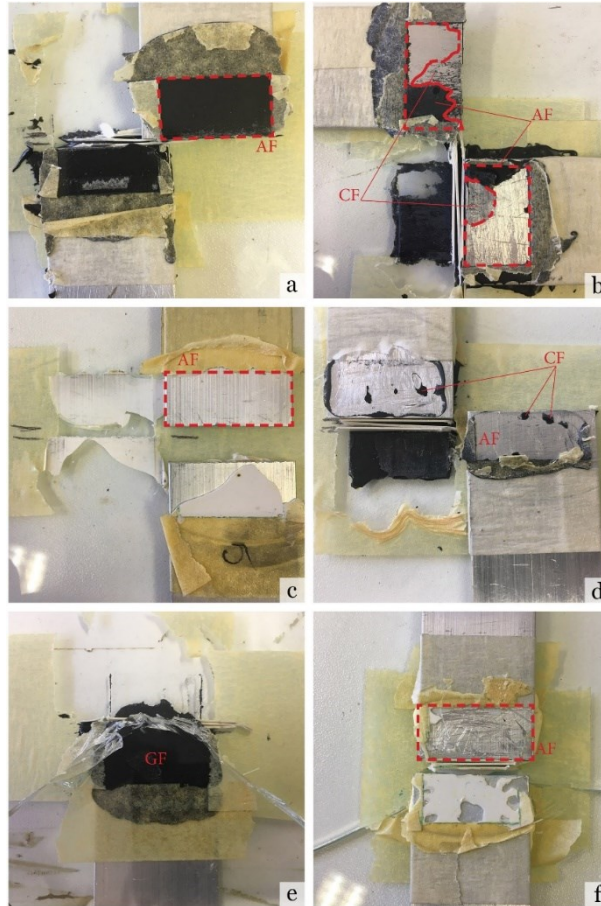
Failure modes of aluminium-glass double lap adhesive joints.
